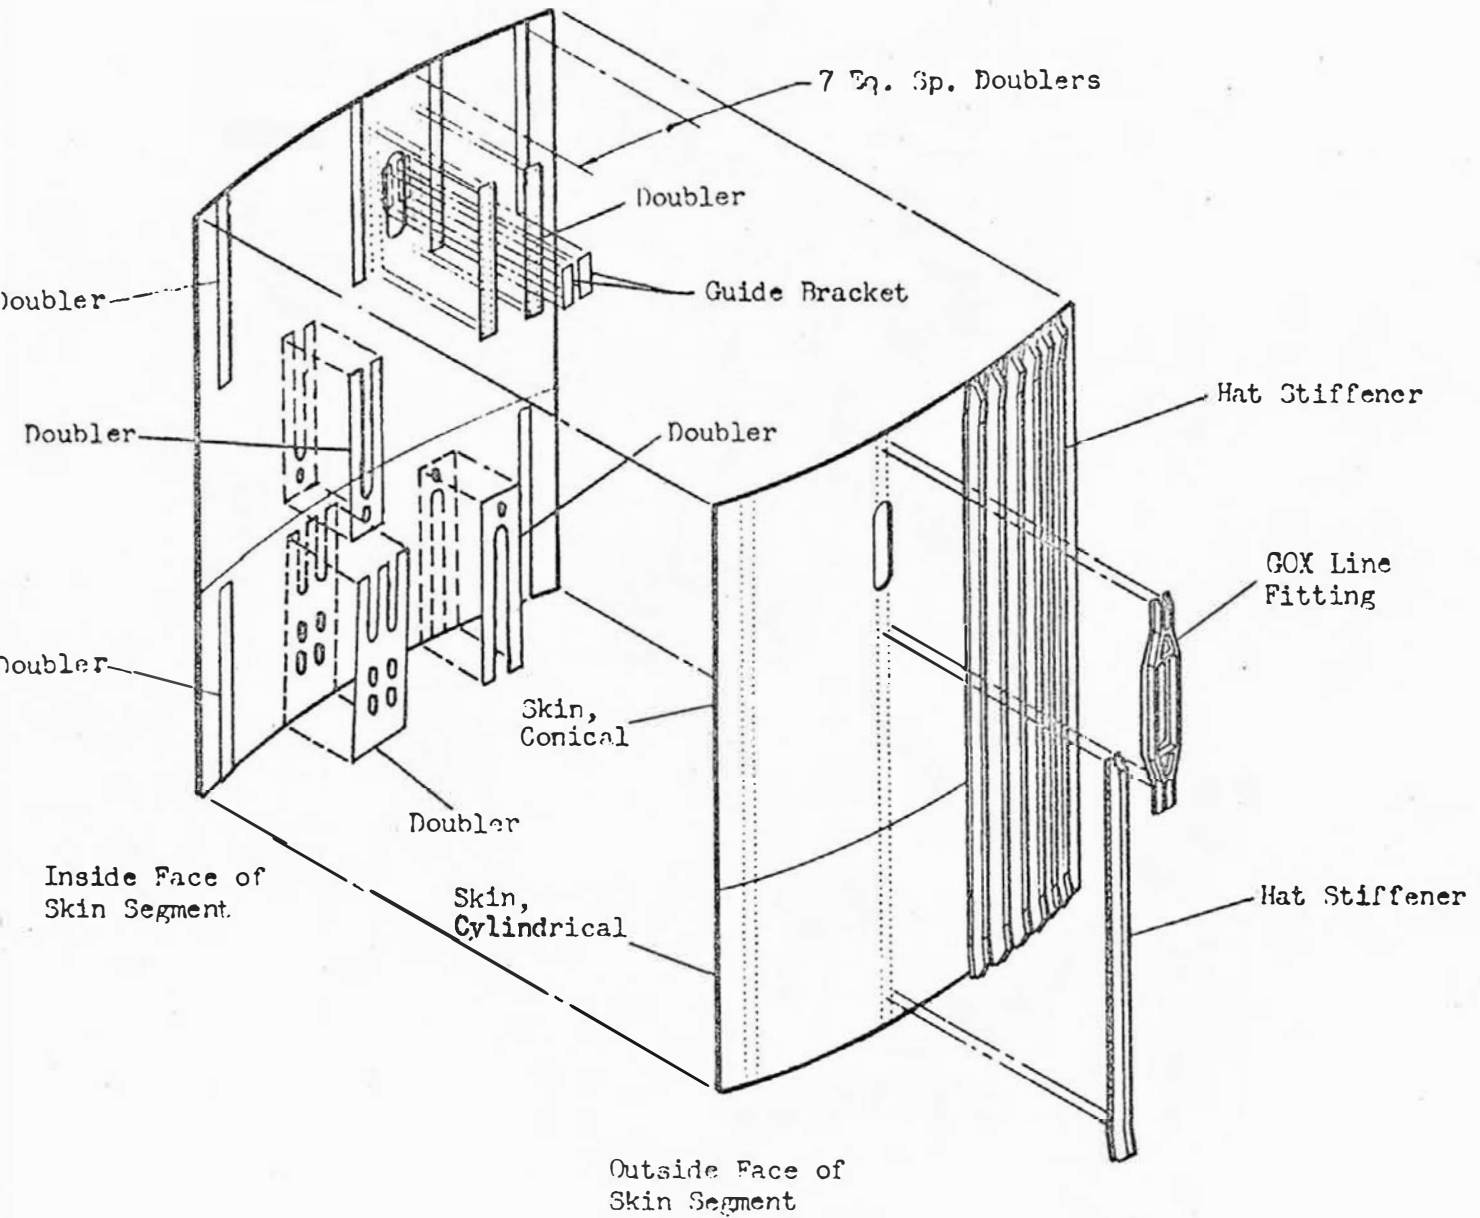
Skin Segment Assembly (GOX Line Fitting)
